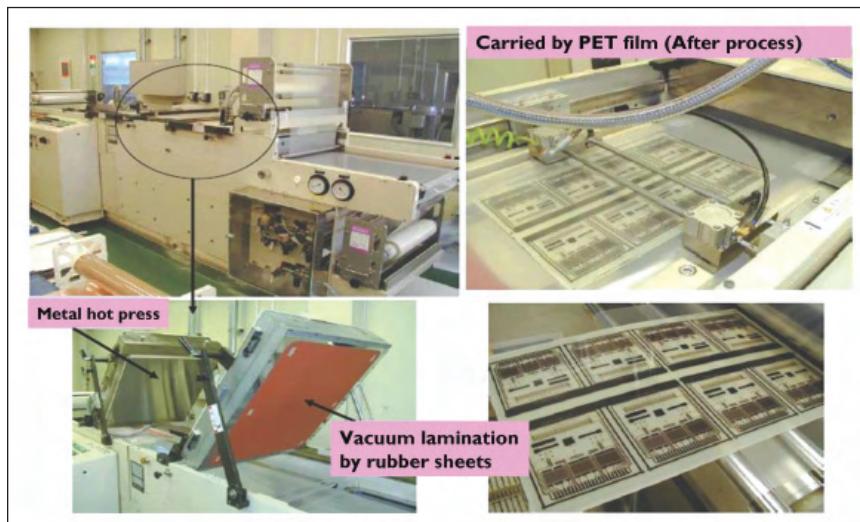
Conveyorized vacuum lamination and hot press[2]
